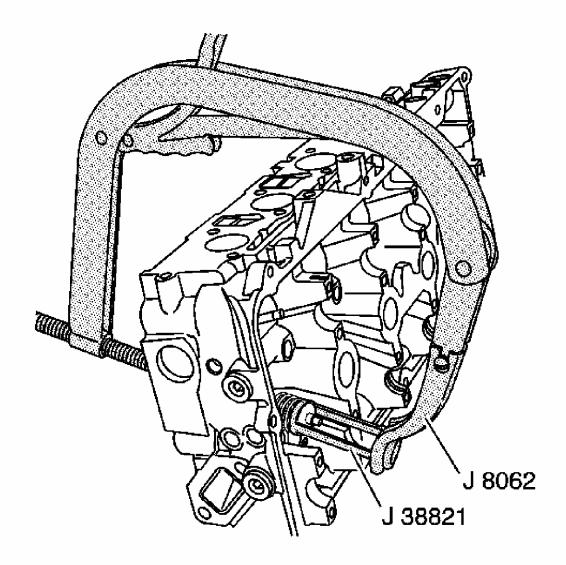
View of J 8062 & J 38821 Courtesy of GENERAL MOTORS CORP.
